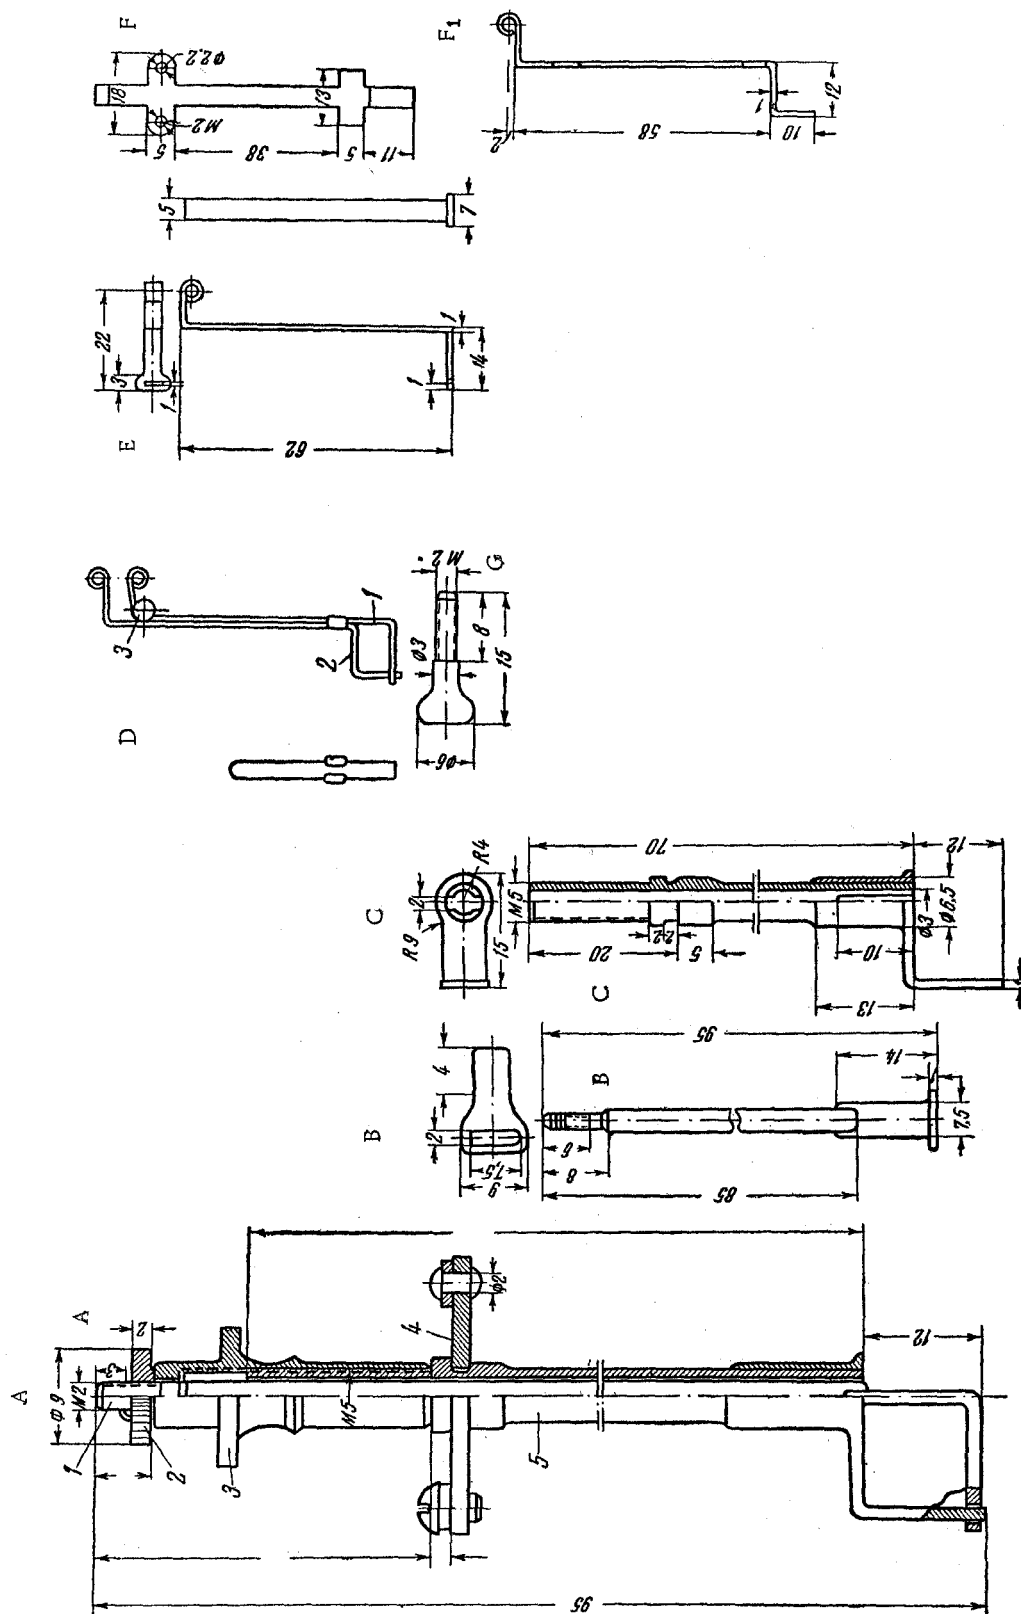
The vascular clamps SZ-2 and SZ-3. A) The SZ-2 apparatus in assembled form; B) detail 1 of the apparatus SZ-2; C) detail 5 of the apparatus SZ-2; D) the SZ-3 apparatus in assembled form; E) detail 1 of the apparatus SZ-3; F) detail 2 of the apparatus SZ-3; G) detail 3 (screw) of the apparatus SZ-3.
